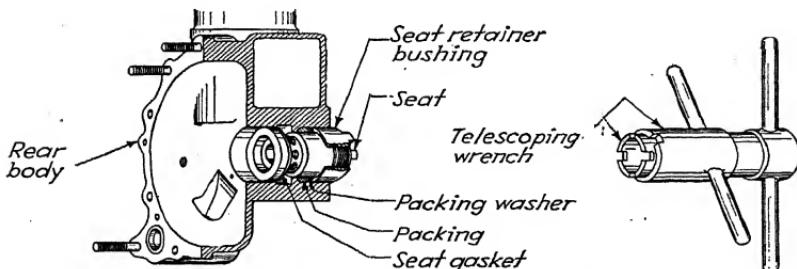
Rear body assembly and telescoping wrench used—Stromberg.
